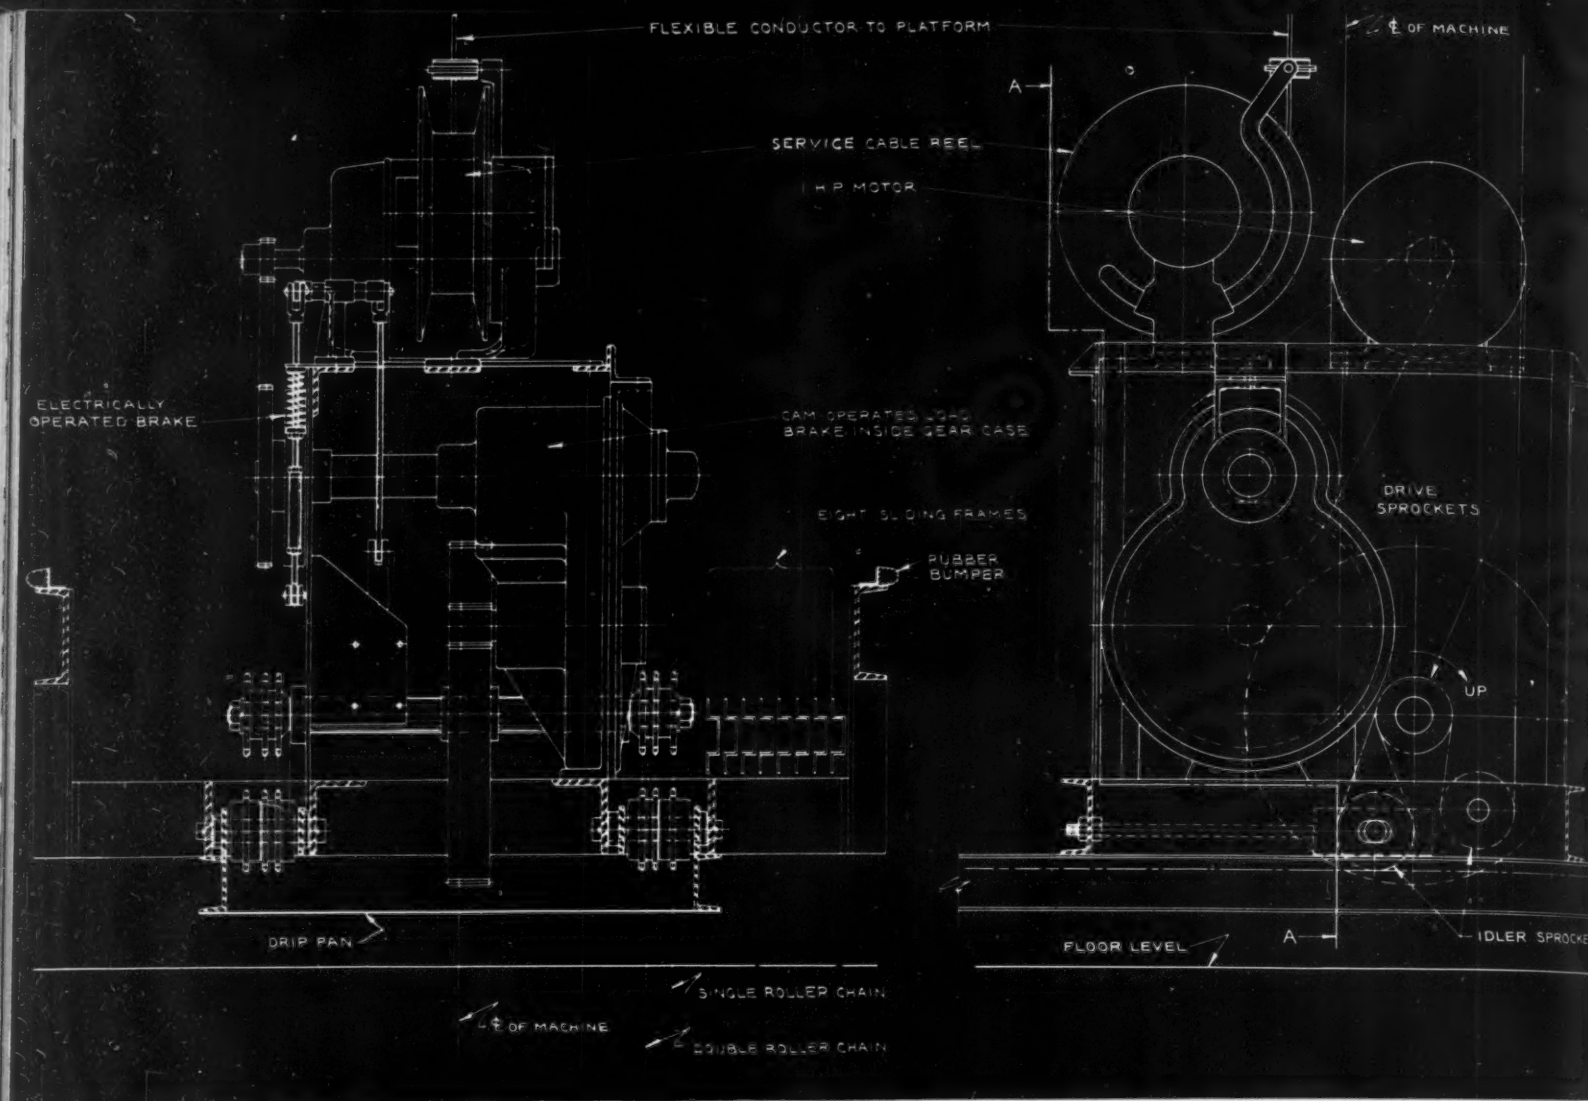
Motor drives chain sprockets through gear reduction unit. Cam-operated load brake enables motor to drive in lowering the platform
